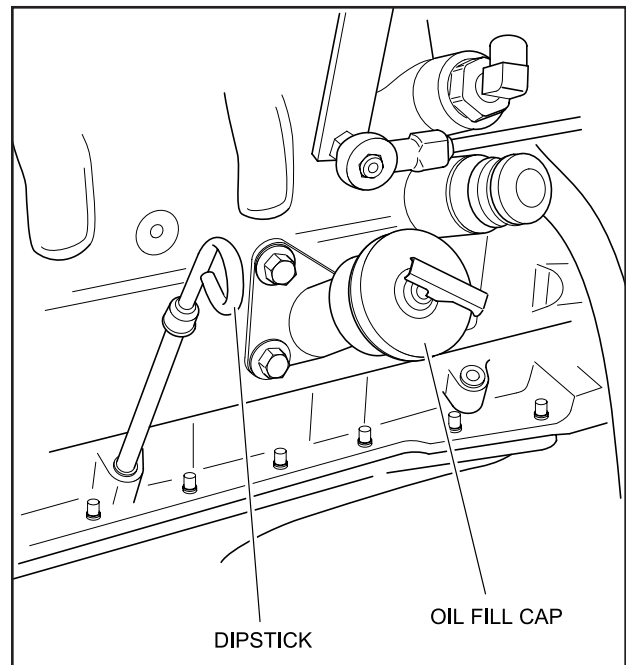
ENGINE OIL DIPSTICK AND FILL CAP
